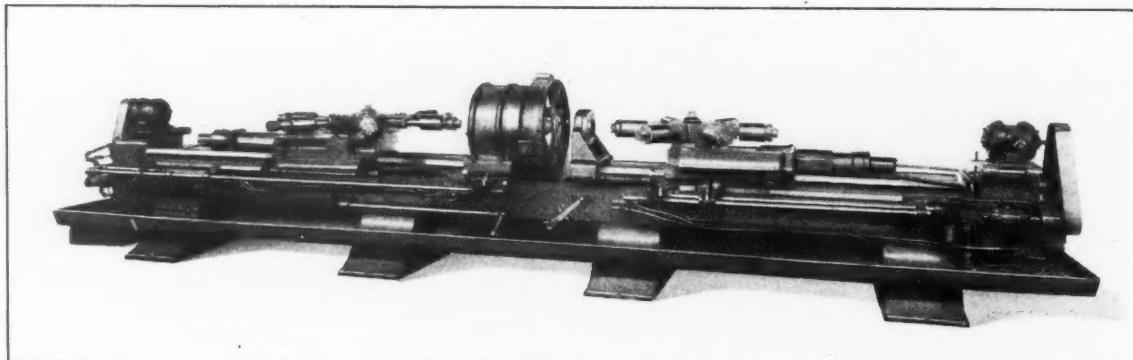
"Fastermatic" Duplex Machine Designed for Simultaneously Machining Both Ends of Wheels for Agricultural Equipment
